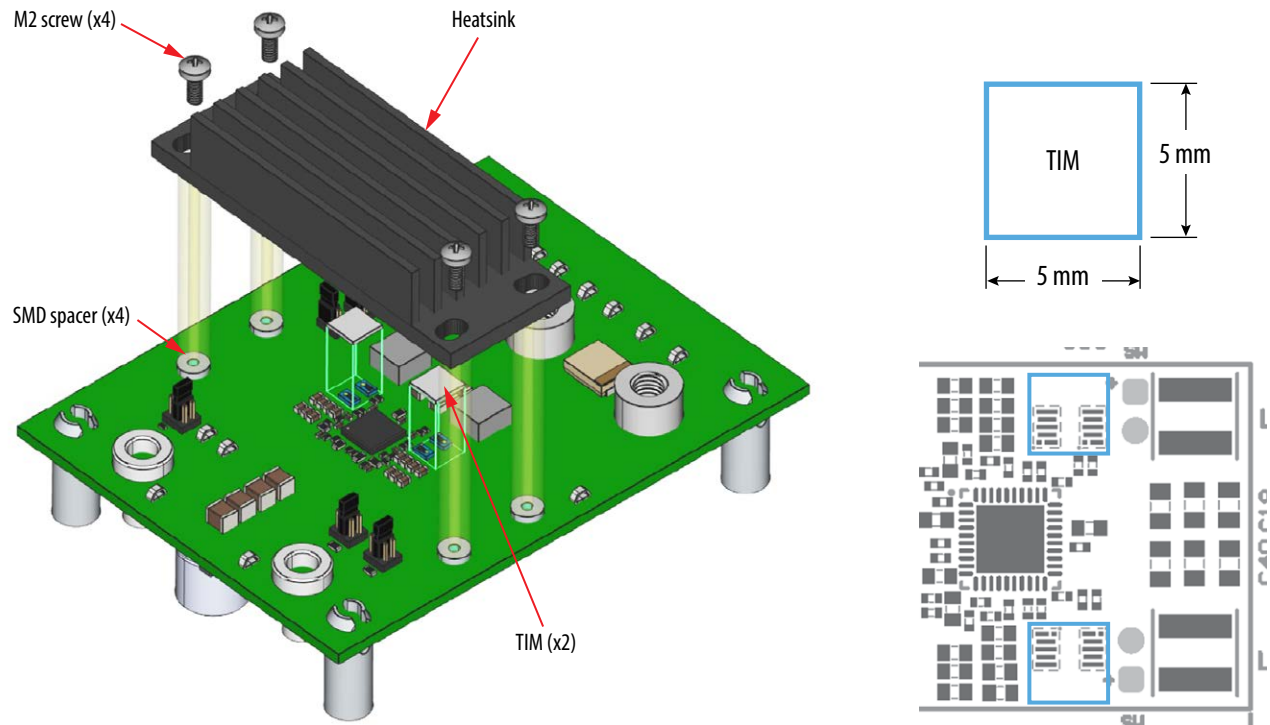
Exploded 3D assembly of heat sink installment and locations of TIM material
